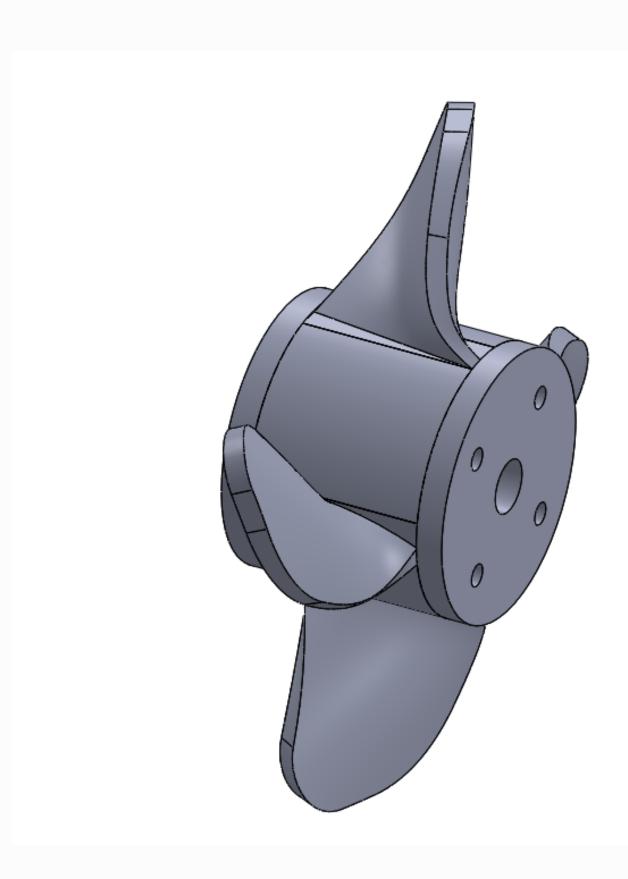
The 3D CAD models of the propeller blades inserted to the boss
